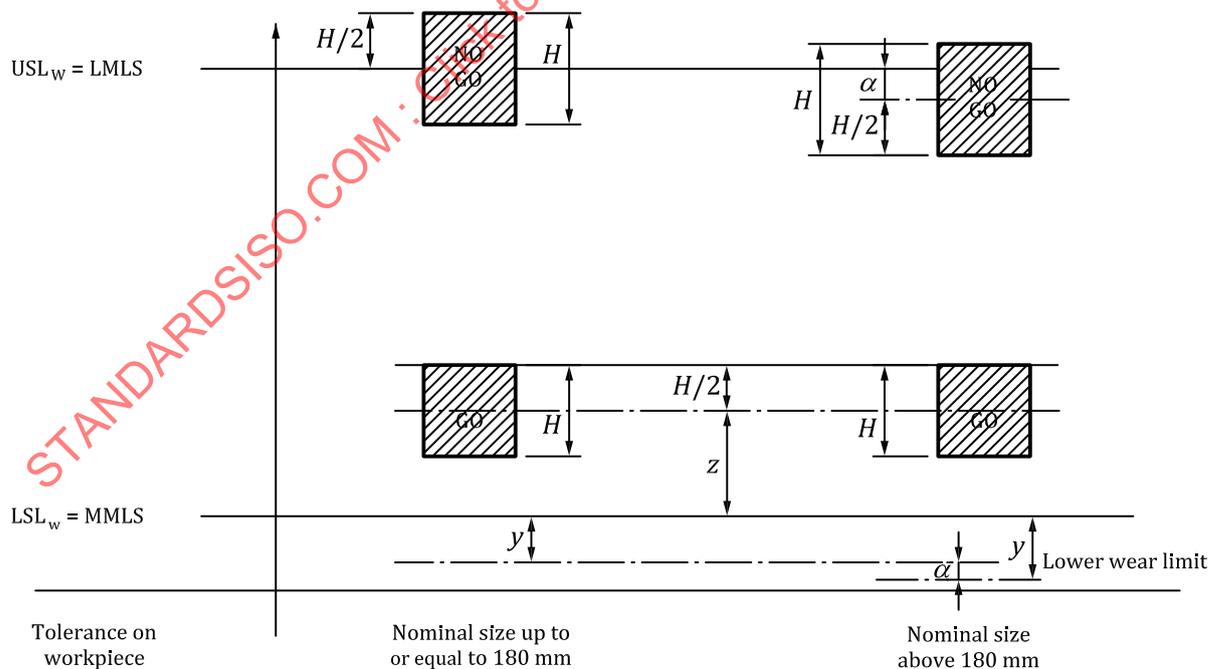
MPL size position for GO and NO GO gauges for workpieces of internal feature of size
